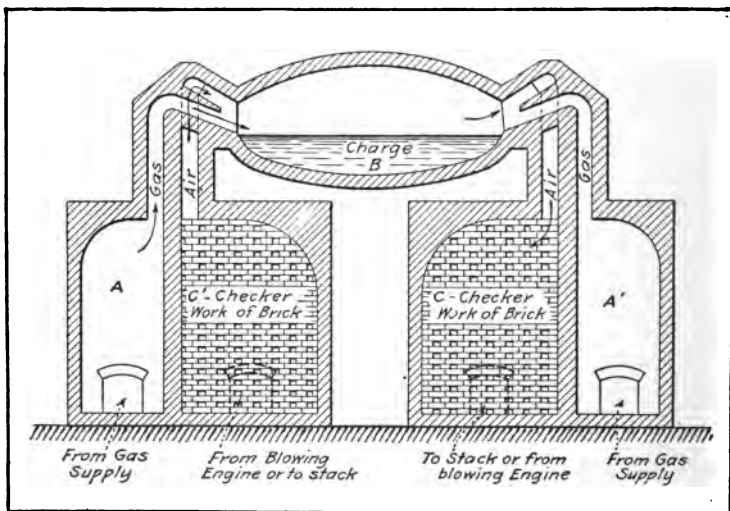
DIAGRAMMATIC VIEW OF OPEN-HEARTH FURNACE WITH REGENERATORS
